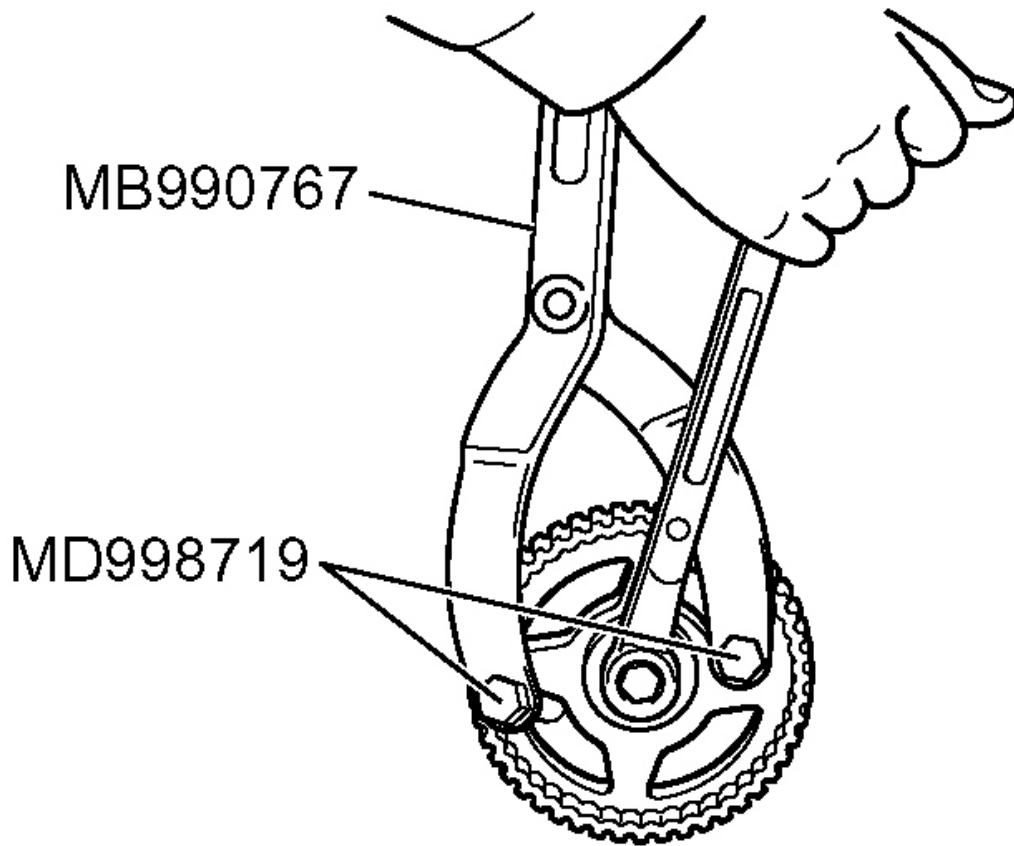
Removing Camshaft And Valve Stem Seal (2 Of 2)
